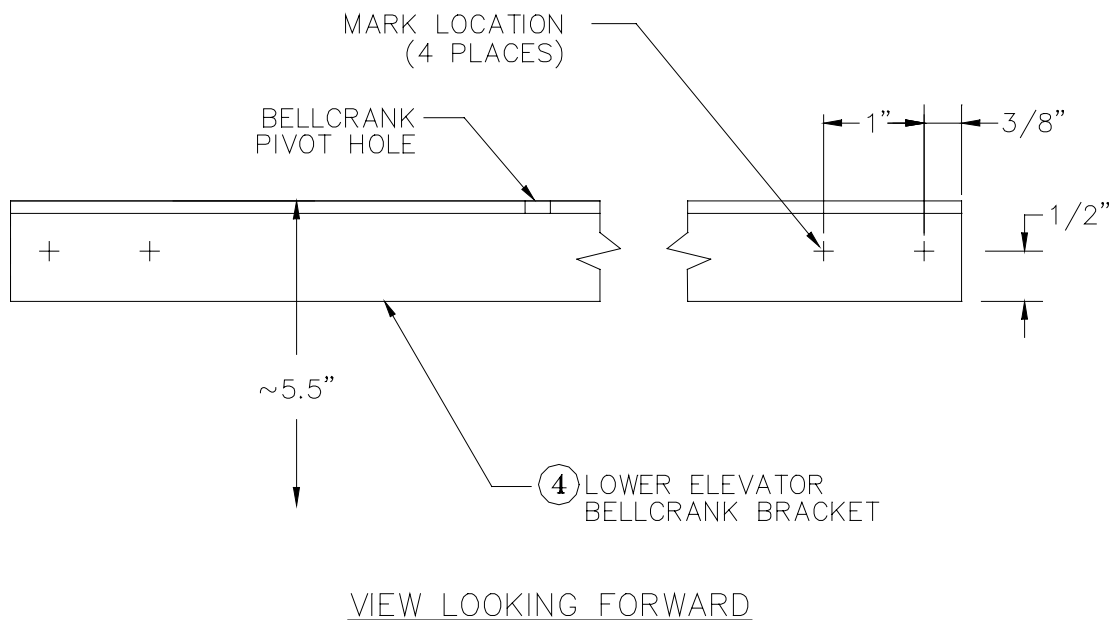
Trimming and Marking Hole Locations on the Lower Elevator Bellcrank Bracket
